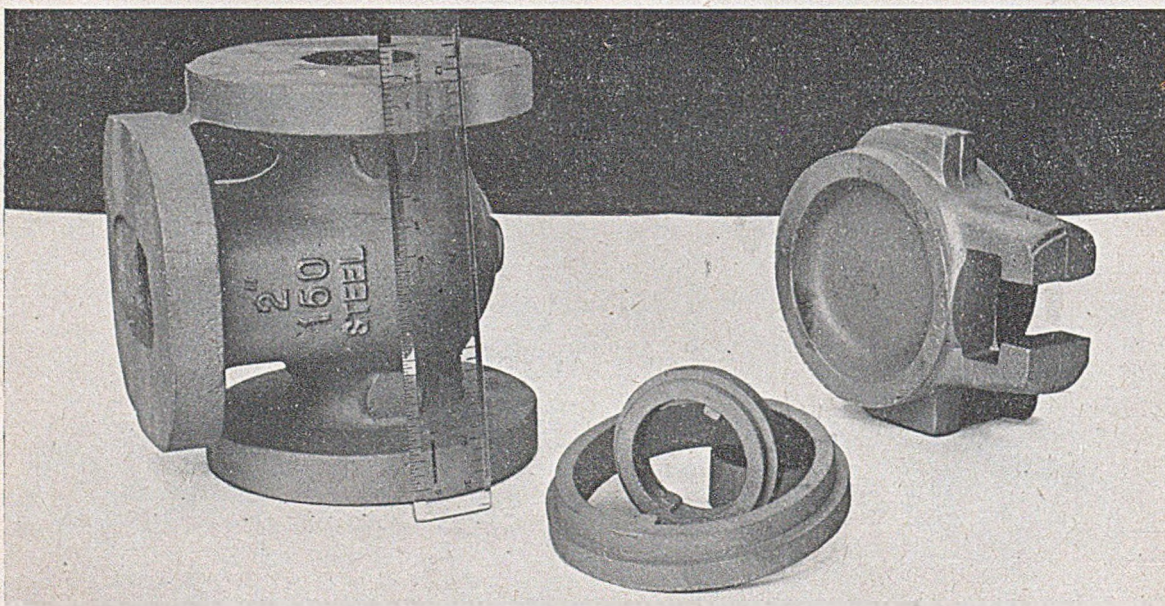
Valve Castings, comprising a Plain-carbon-steel Body and 13 per cent. Chromium-steel Wedge and Seatings, all made in Shell Moulds.
